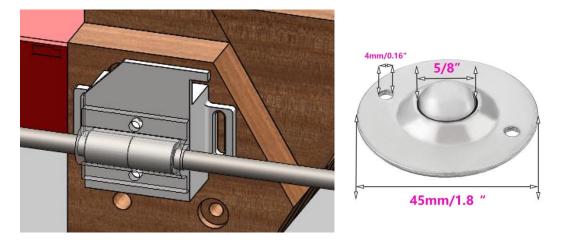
Spring casing (white) and rod-bearing casing (transparent) (left) and transfer bearings and its dimensions (right) (MoKell, 2011).
